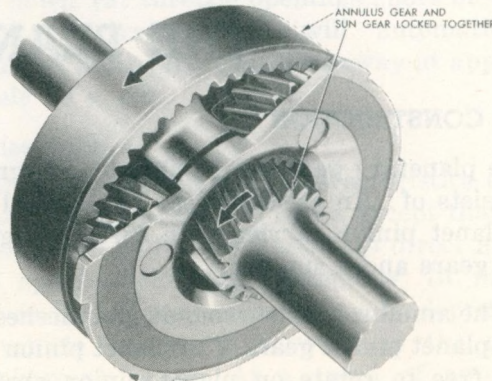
Planetary Gear Set (Annulus and Sun Gear Locked)—Direct
